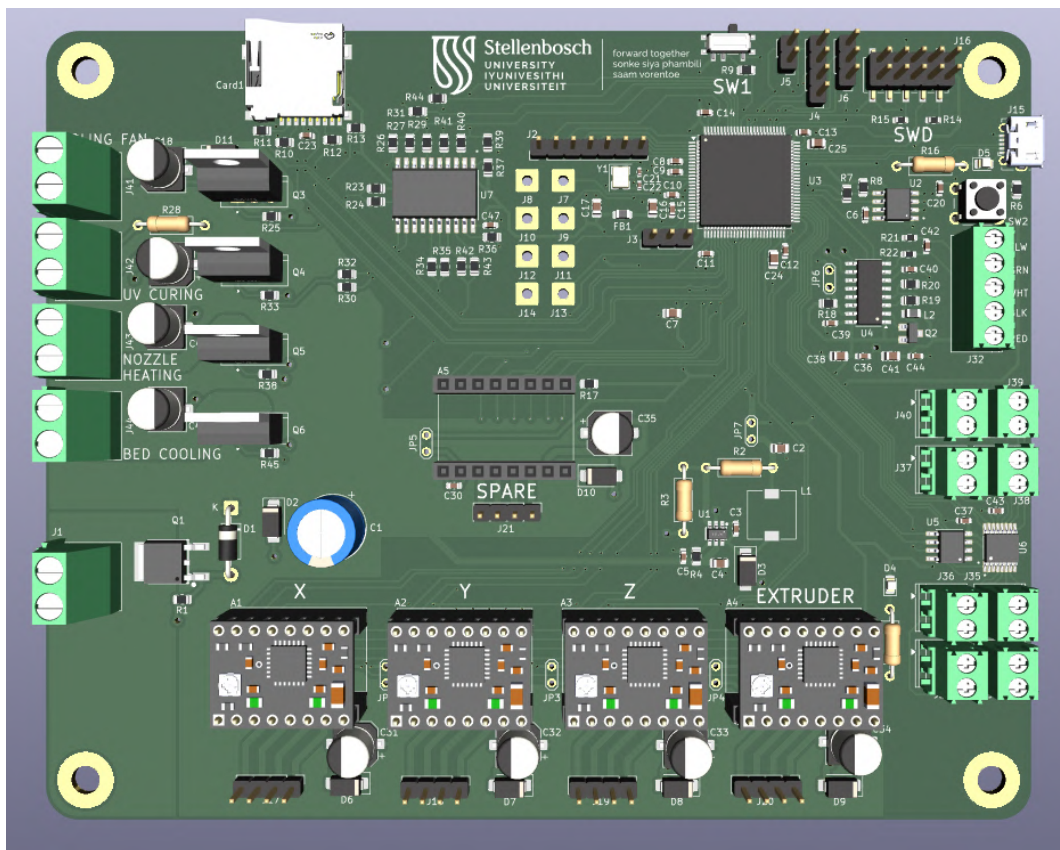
3D model of the assembled PCB illustrating overall component layout
